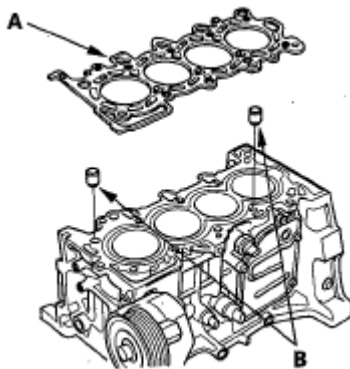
Identifying Cylinder Head Gasket & Dowel Pins On Engine Block
